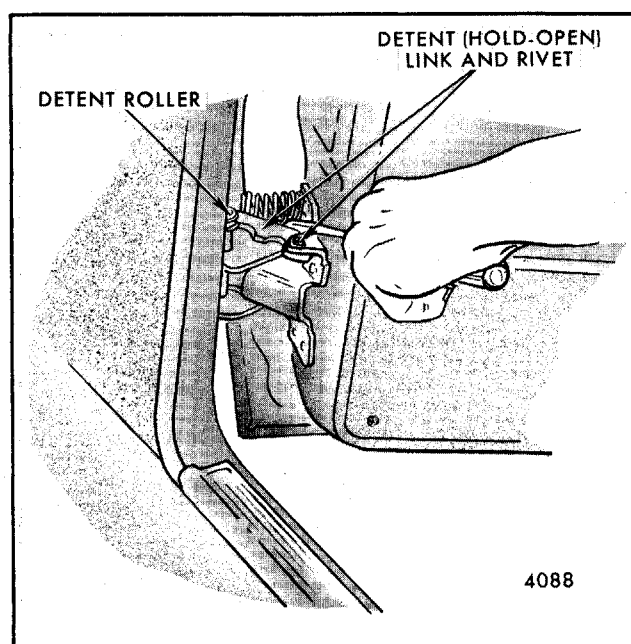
Front Door Hinge Hold-Open Spring Removal - "X" Styles
